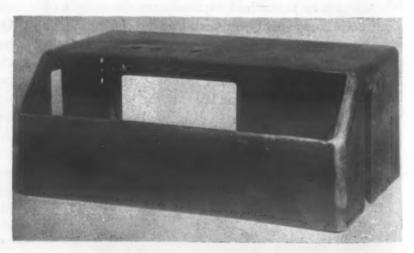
By being made from magnesium alloy, this case made as a single draw, after which the holes was formed in one draw, rather than from welded sheet as was previously necessary.
